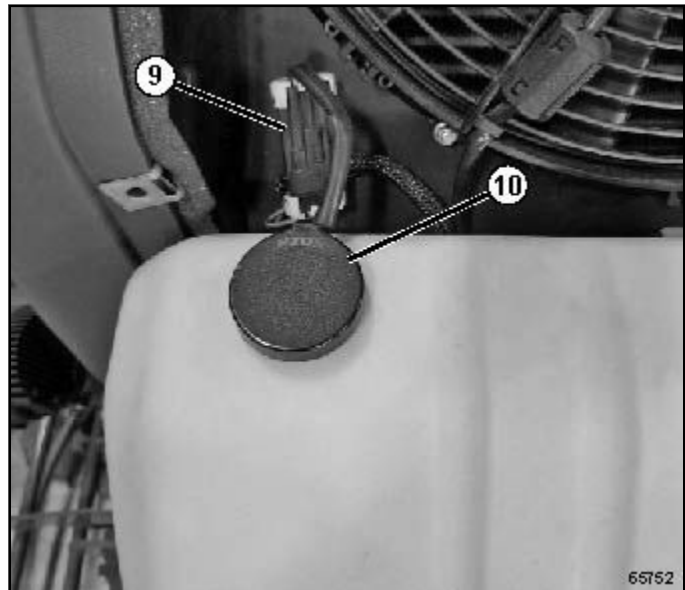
Fuel Level Sending Unit Removal and Installation
